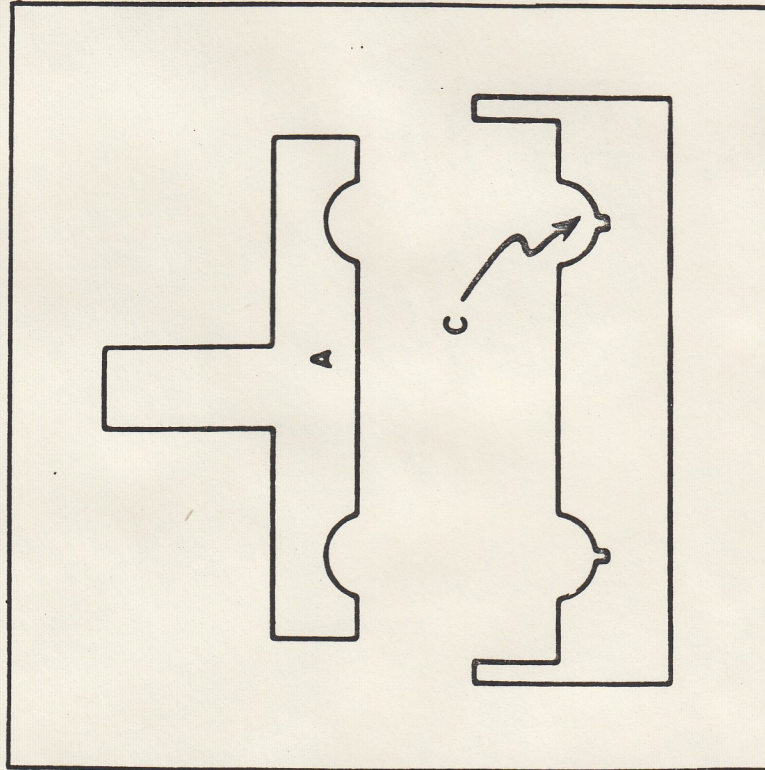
SECTIONAL VIEW OF THE ROTOR GRINDING MACHINE
